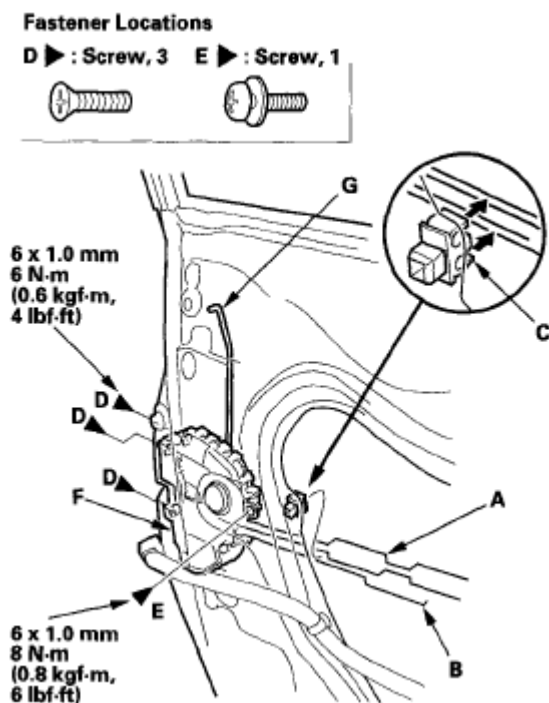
Detaching Latch Cable And Inner Handle Cable
